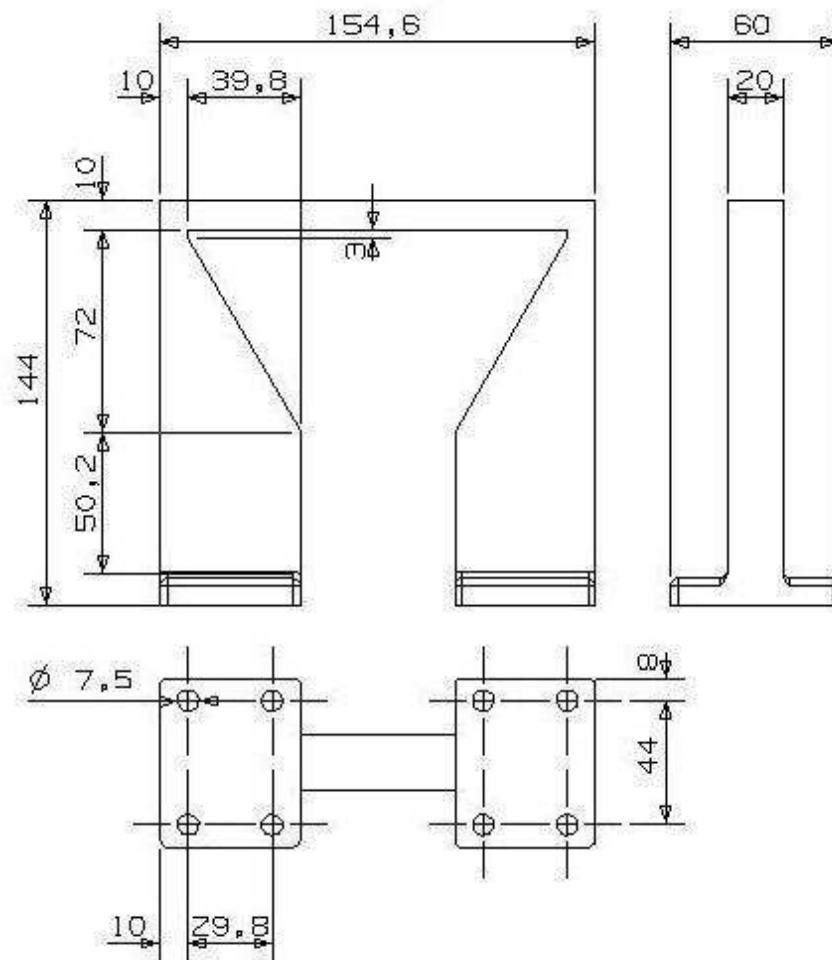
A Schematic design of the air bearing holder where the dimensions are only a global indication of the final design.
